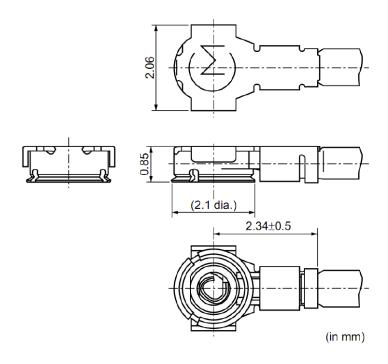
Specifications of Mating Plugs Using Ø0.81mm Coaxial Cables
